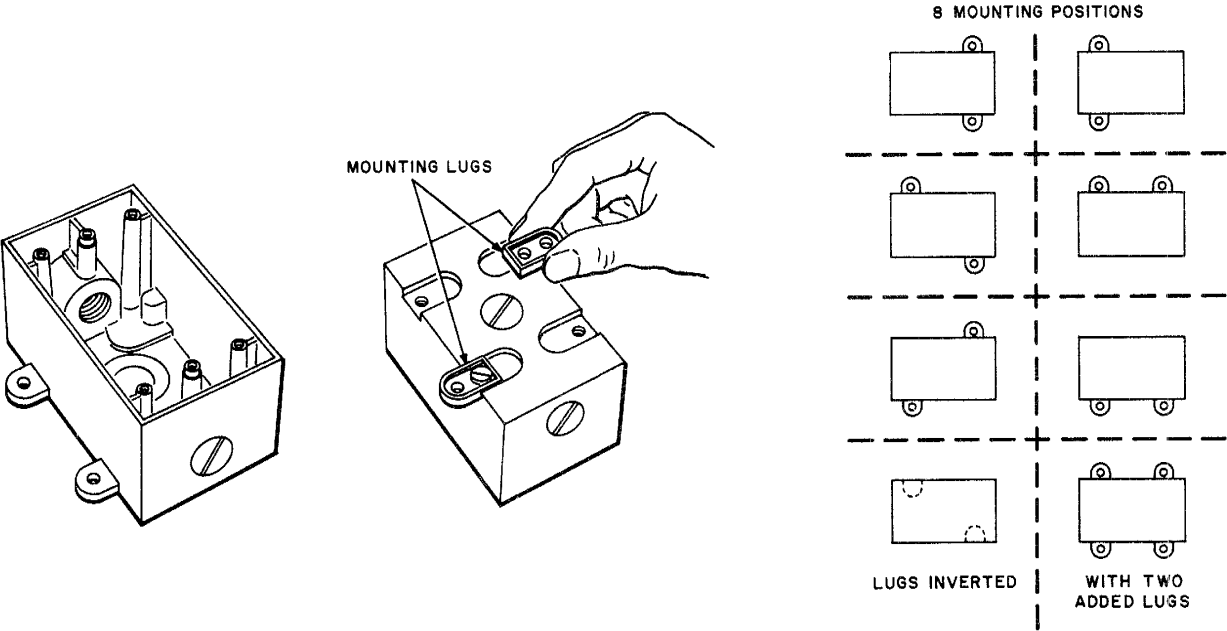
Housing Box Showing Reversible Mounting Lugs
